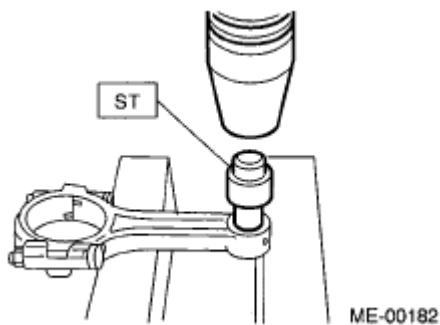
Pressing Bushing With Connecting Rod Bushing Remover & Installer ST499037100
